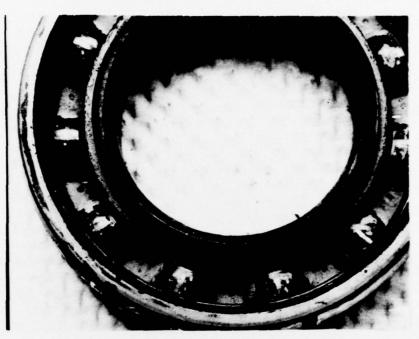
Bearing S/N TRL-40. 2x Enlarged View.
